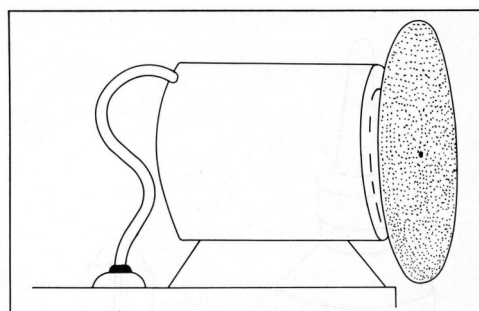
A solidly mounted sanding wheel is a prime necessity.
